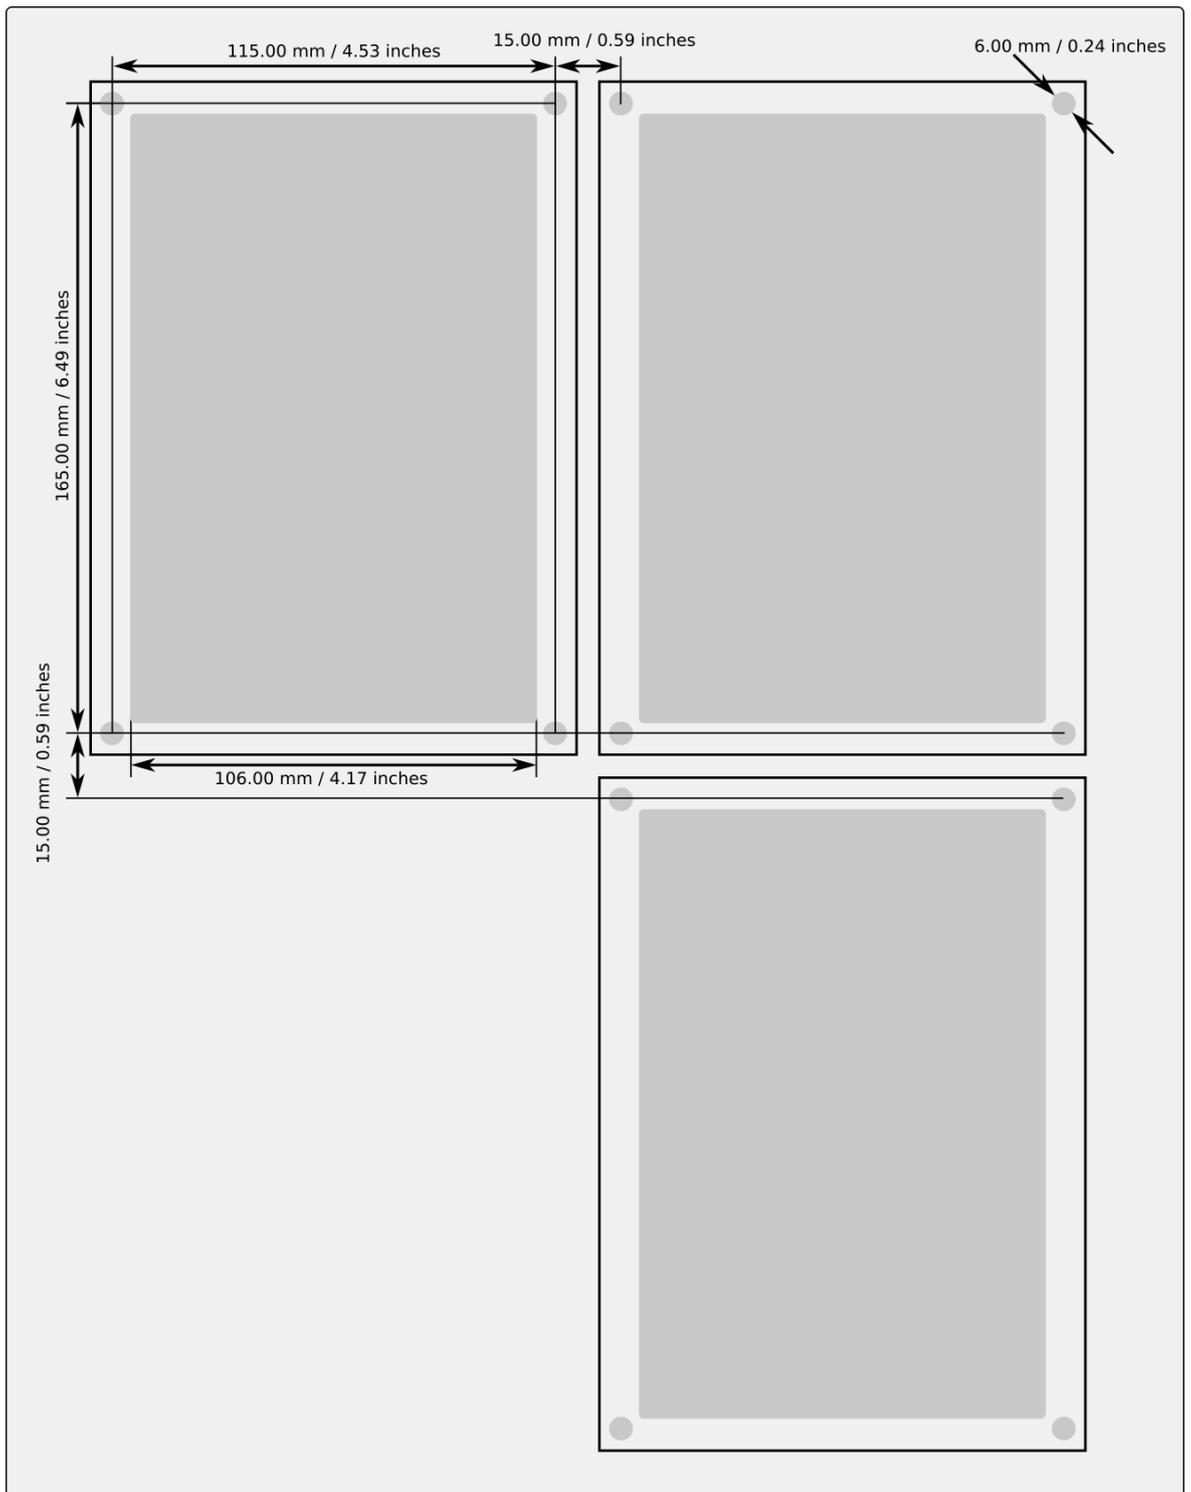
176. Panel cutout dimensions and device spacing.
